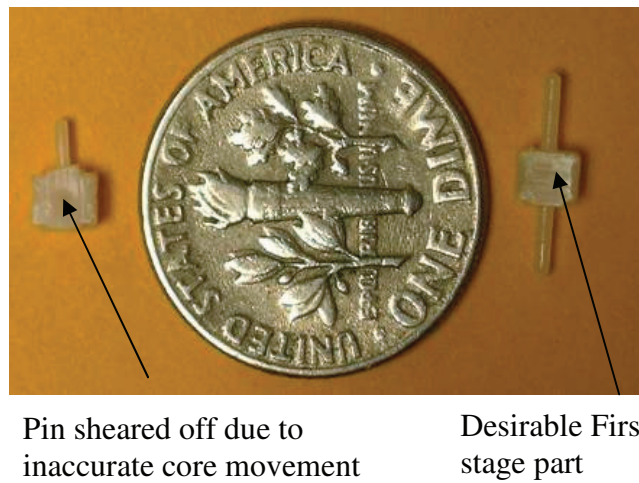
Example defective component due to inaccurate cavity movement
